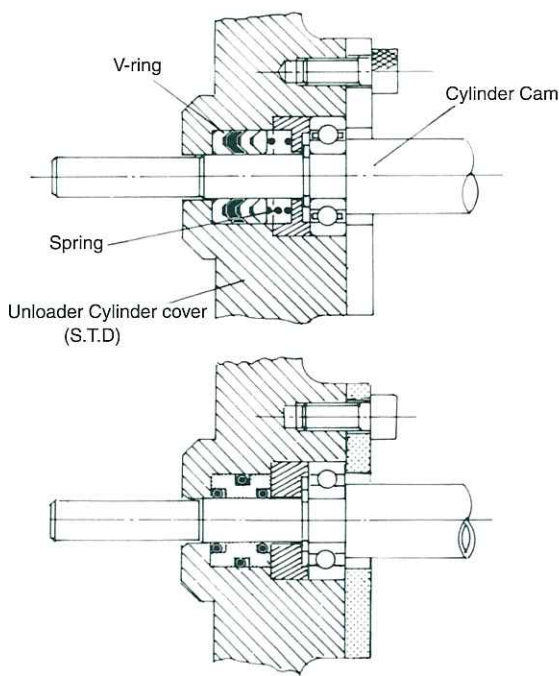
A Unloader Indicator Cylinder Cam Portion (Helium Compressor)
